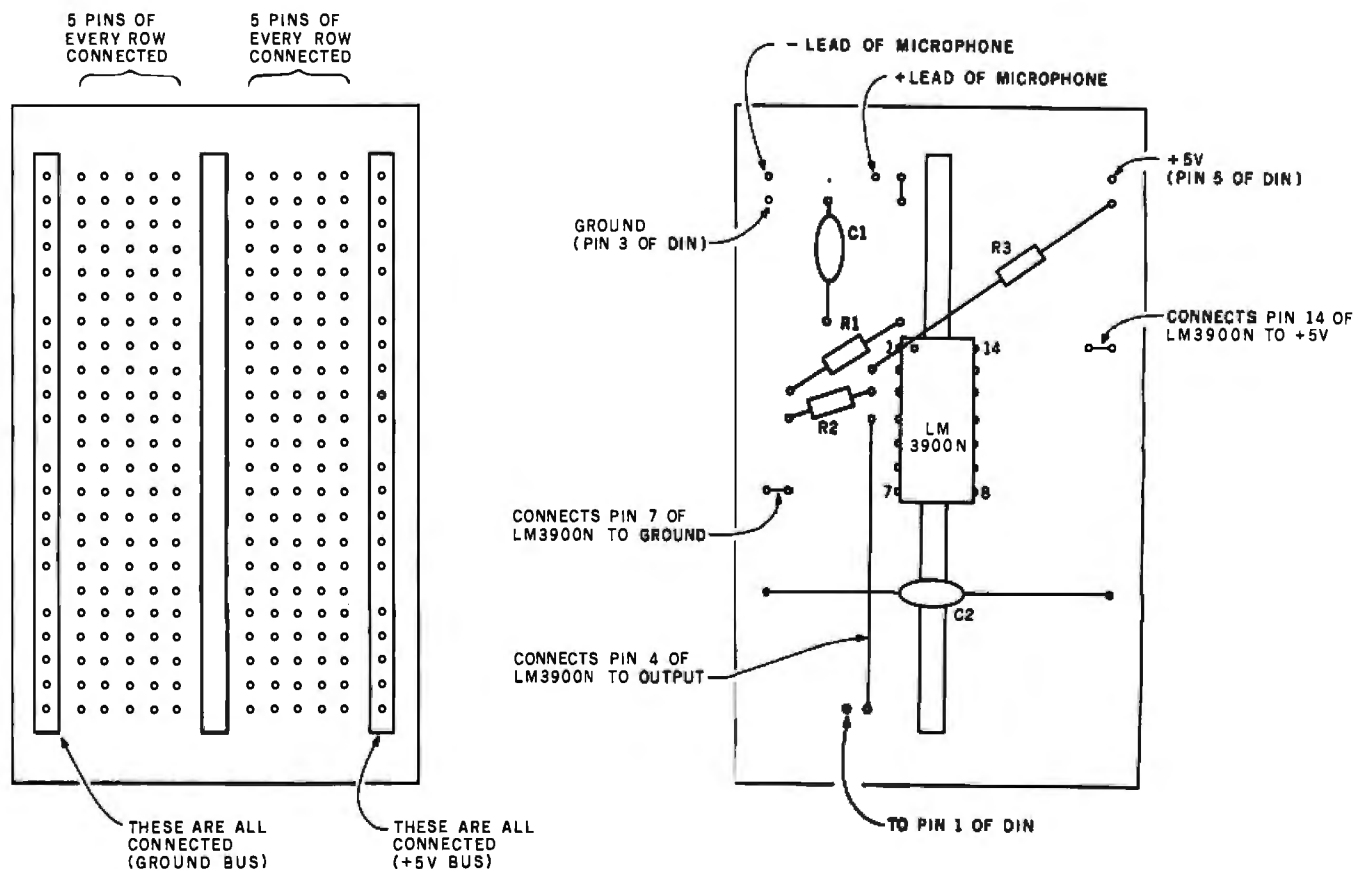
The project uses an inexpensive prototype circuit board, which allows the six components to be connected without soldering or wire-wrapping.
